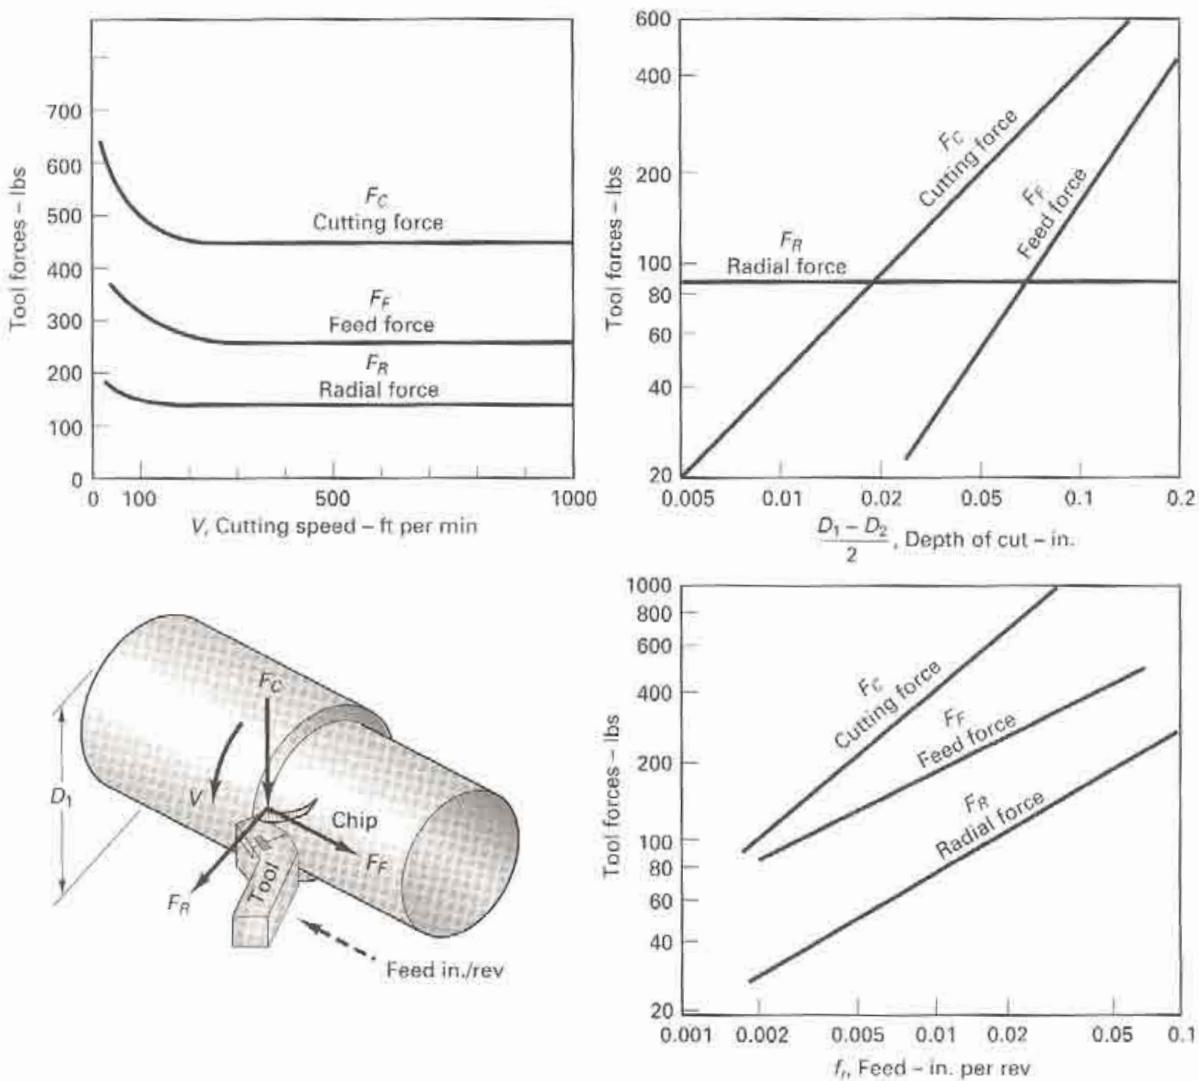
Oblique machining has three measurable components of forces acting on the tool. The forces vary with speed, depth of cut, and feed.
